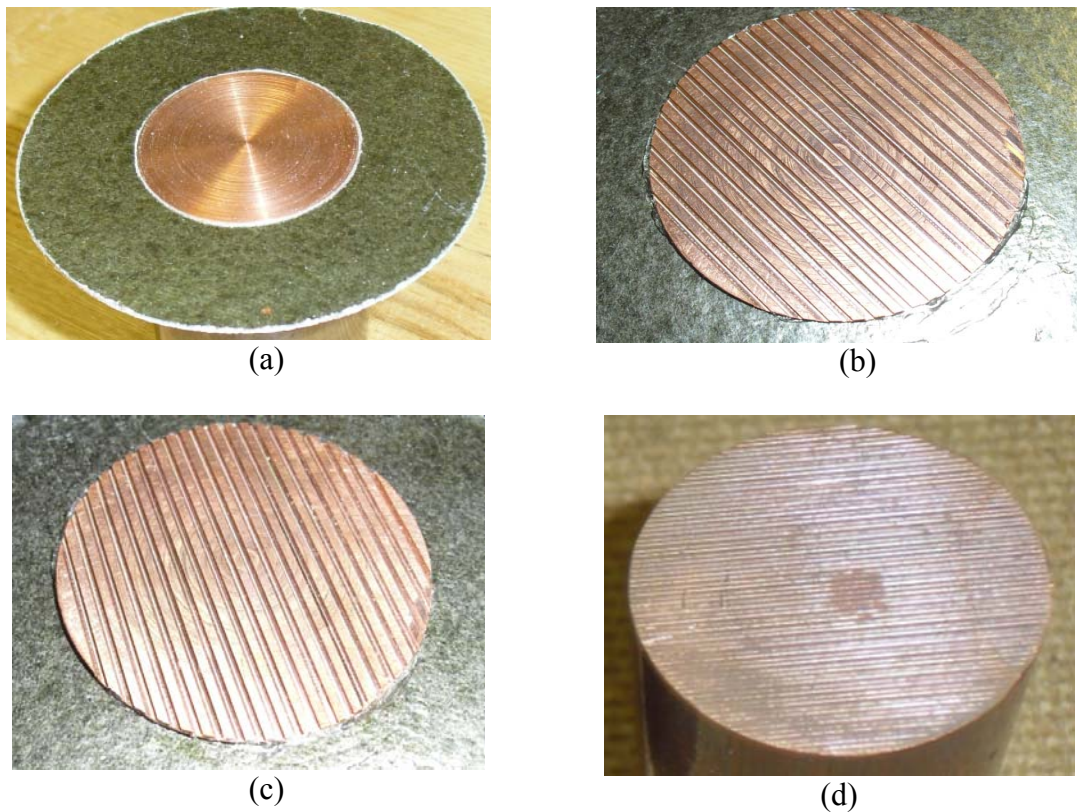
Samples of smooth and modified surfaces: (a) smooth surface, (b) 1.27 mm groove surface, (c) 2.03 mm groove surface and (d) 0.06 mm groove surface
